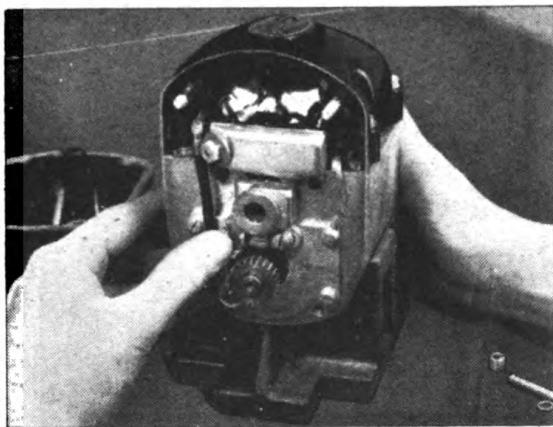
Checking Breaker Arm for Free and Easy Operation
